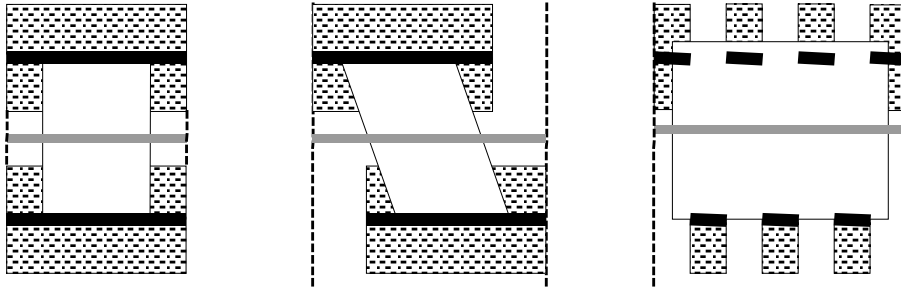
Tool geometries of different rollers approximated by piecewise-linear structures.
